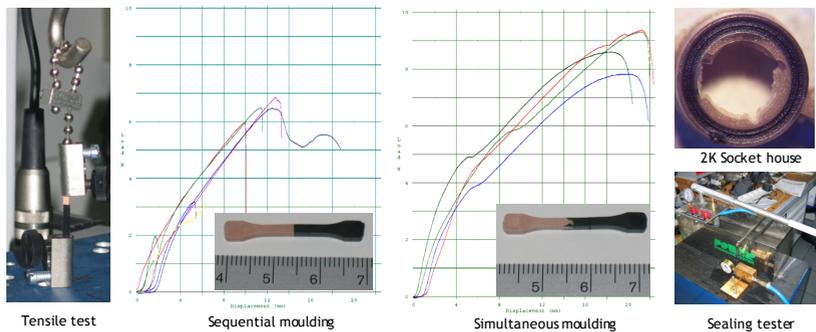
Tensile test performed on 2K tensile bar and sealing test performed on 2K moulded Socket house.
